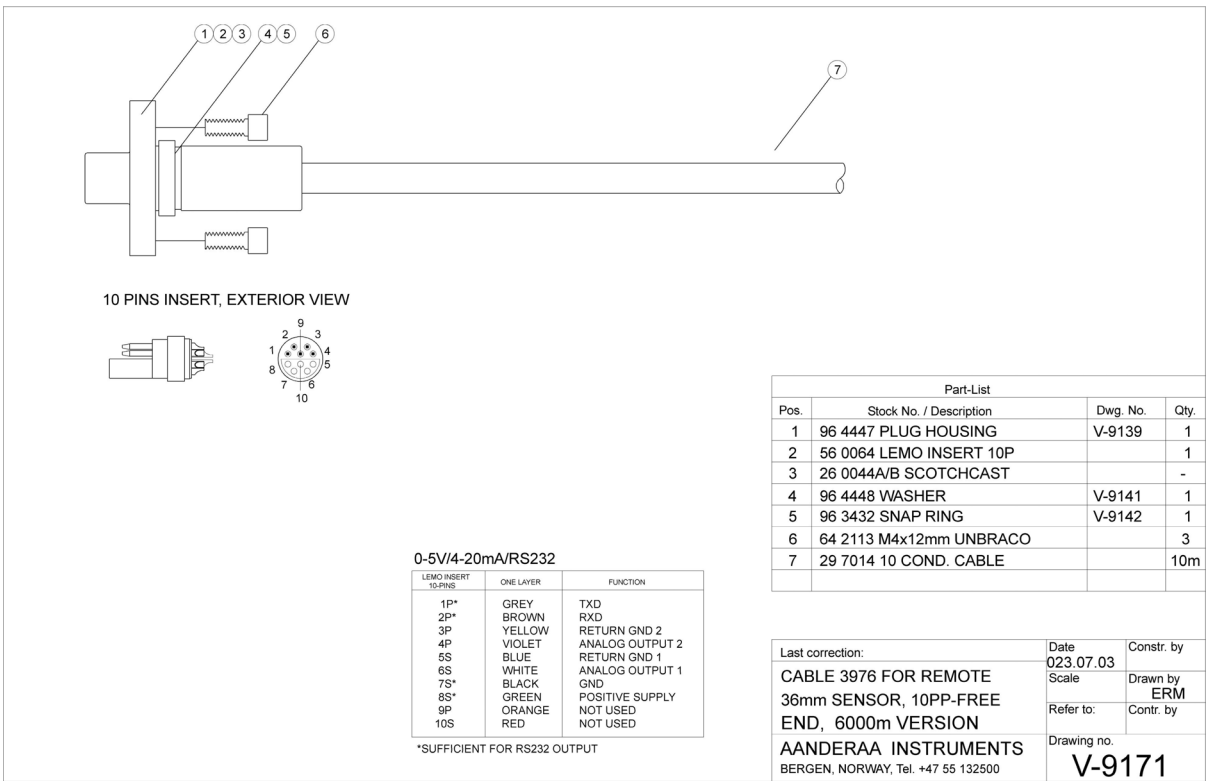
Drawing Cable 3976 (1000-6000 m)
